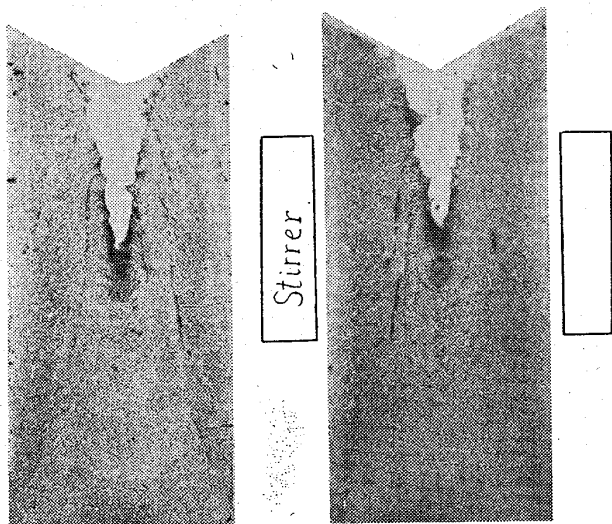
Sulphur print of longitudinal cross section of No. 2 ingots.
